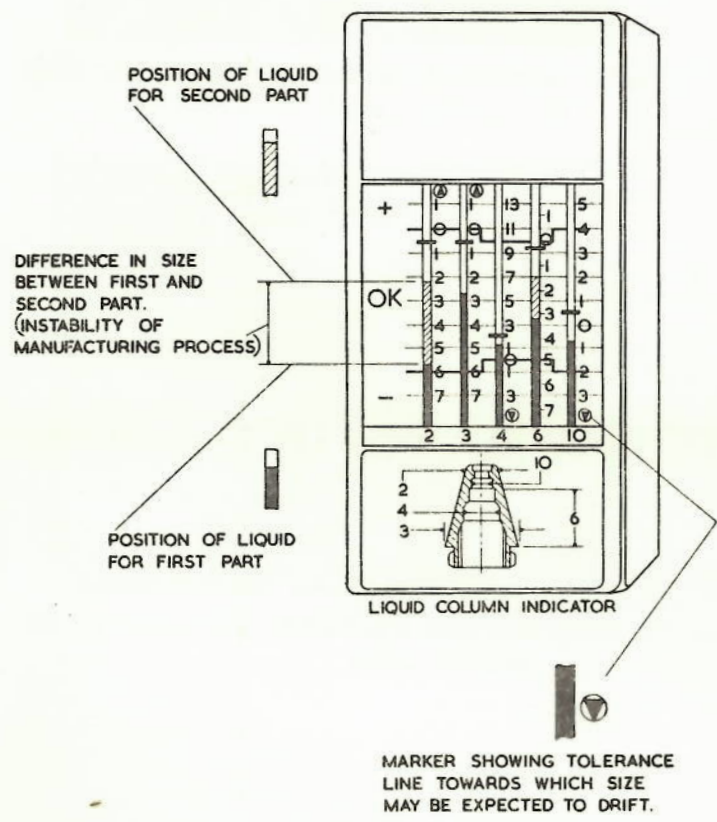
INDICATOR PANEL FOR FIVE DIMENSIONS INSPECTED.
